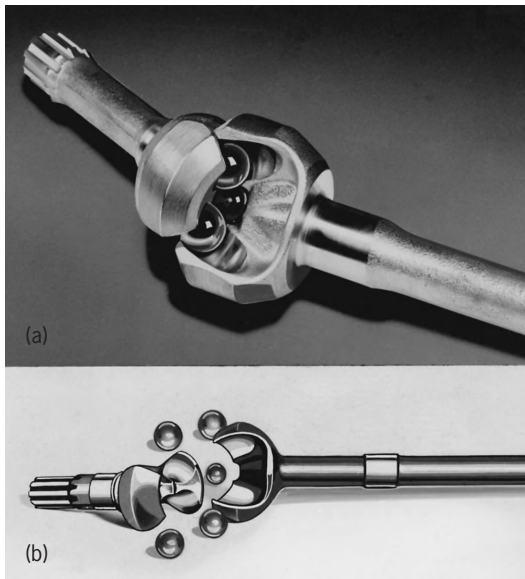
Constant-velocity universal joint sometimes called a Rzeppa joint. (a) Partially separated cutaway. (b) Disassembled joint showing the arrangement; the right-hand member has been cut away. (Bendix Aviation Corp.)
